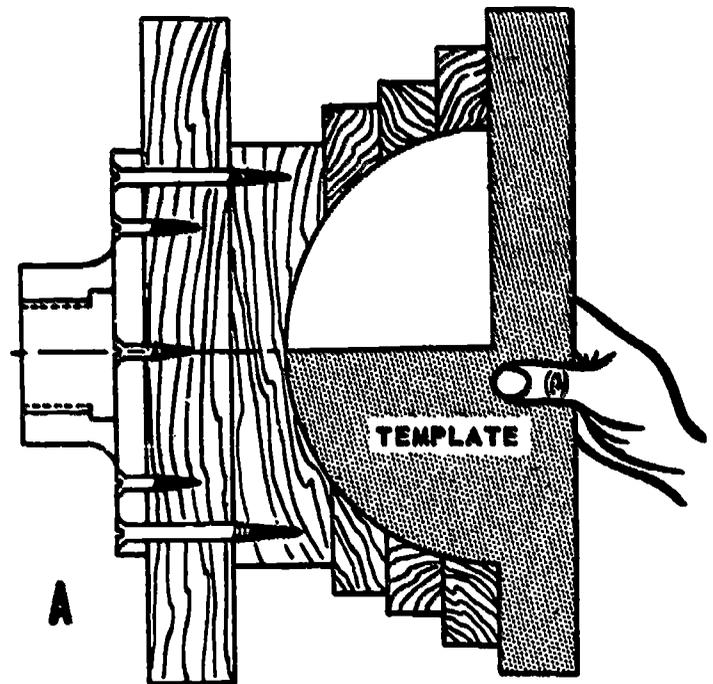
Using a diamond point lathe tool in faceplate turning.
